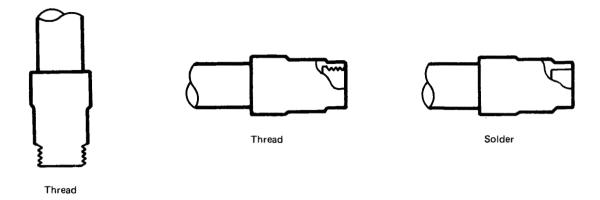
B STRAIGHT INLET CONNECTION, INTEGRAL WITH VALVE HOUSING
